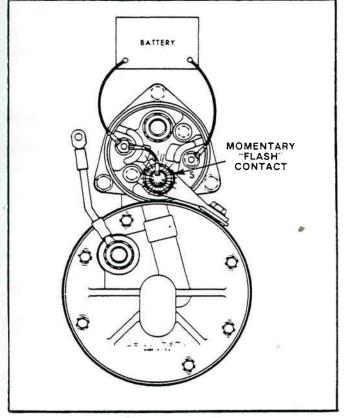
Connections for Checking Pinion Clearance (42-MT).
